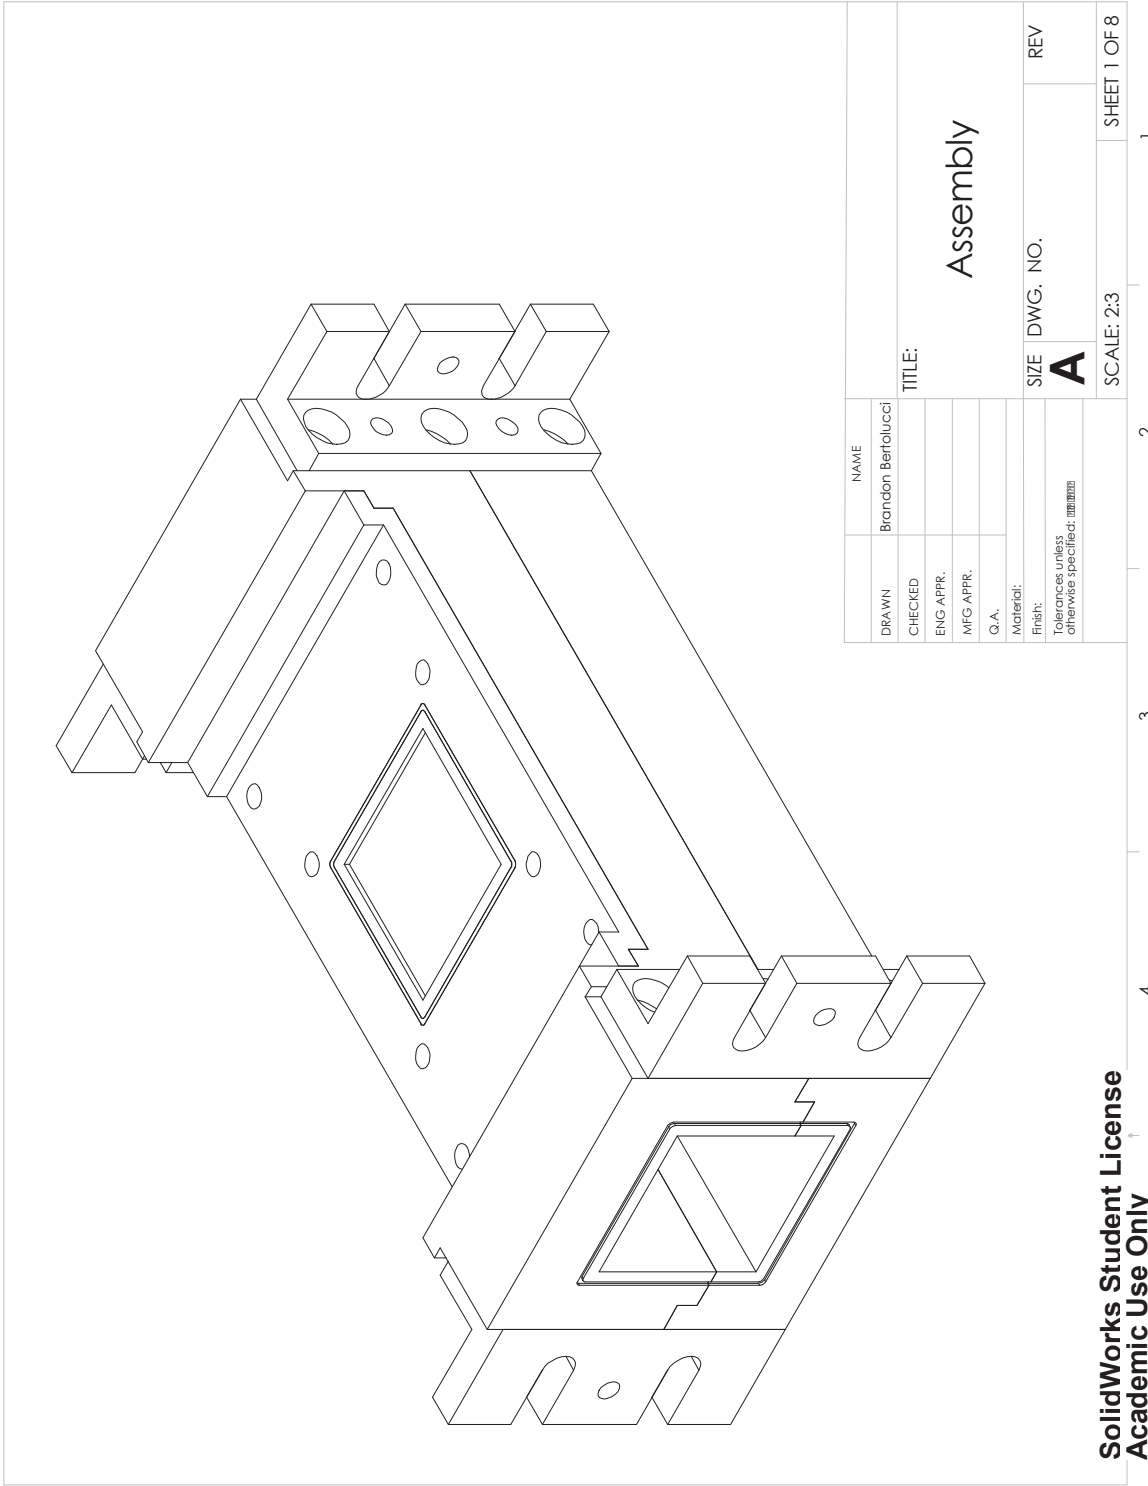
Isometric solid view of speaker section with mounting brackets.
